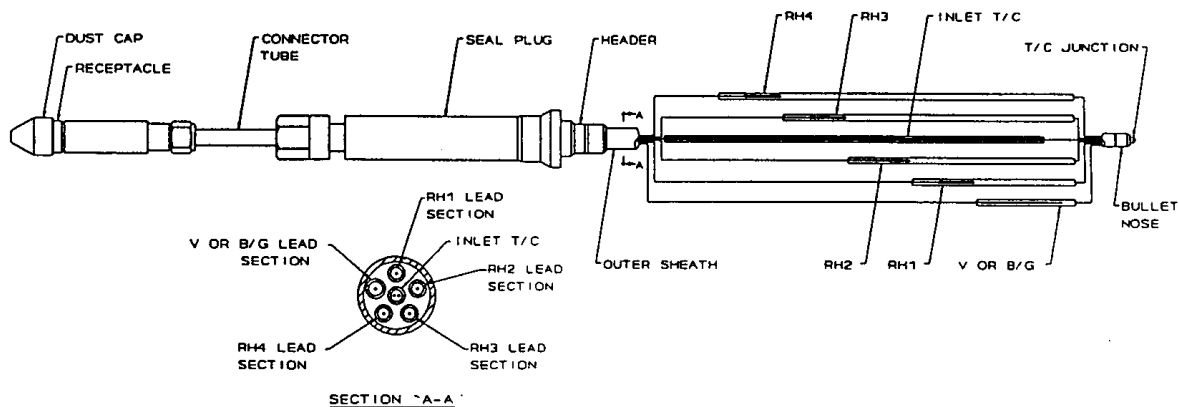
Bottom mounted rhodium self-powered detector assembly for pressurised water reactors
